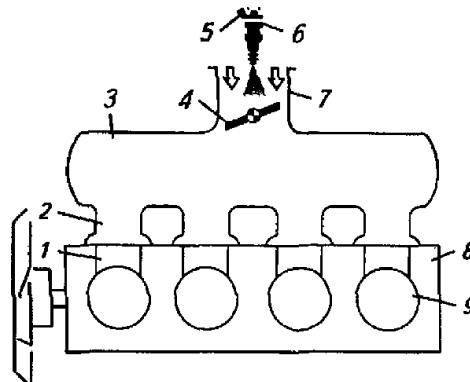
Block diagram of the central fuel injection system: 1 – intake channel; 2 – intake pipe; 3 – intake manifold; 4 – throttle valve; 5 – electrical connector; 6 – fuel injector; 7 – air nozzle; 8 – engine; 9 – cylinder
